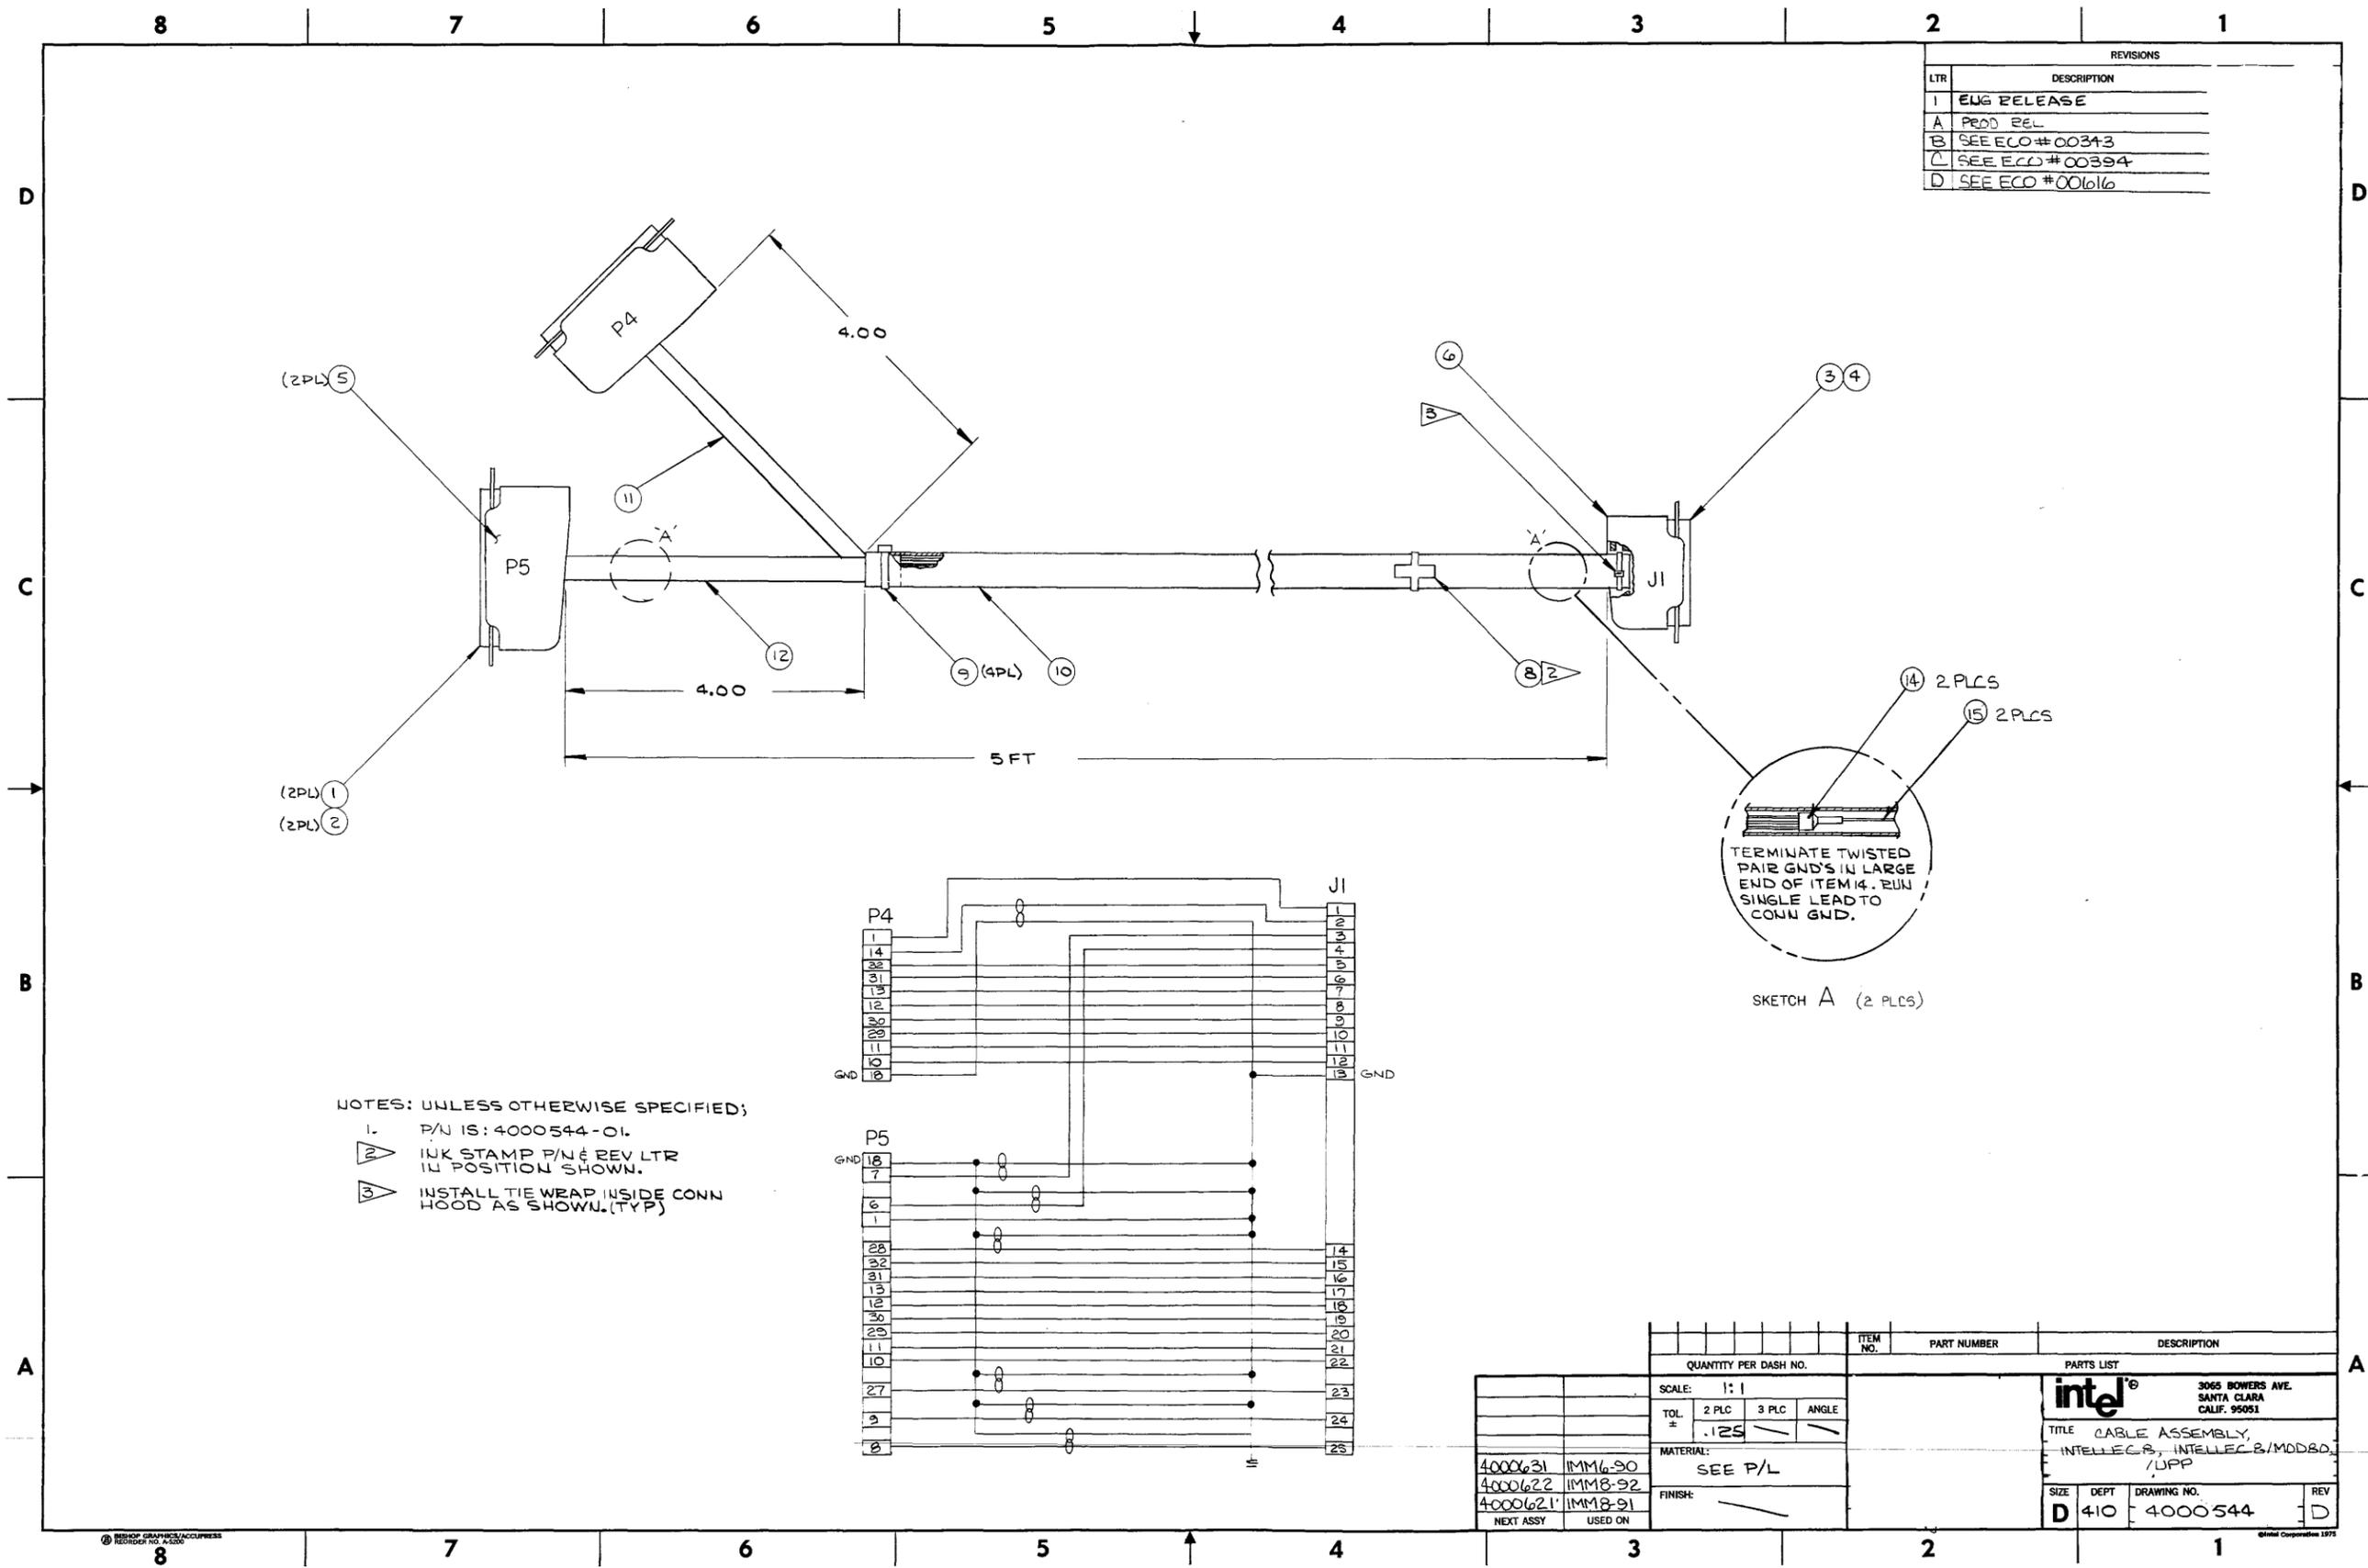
UPP-Intellec 8 Interconnecting Cable Assembly
